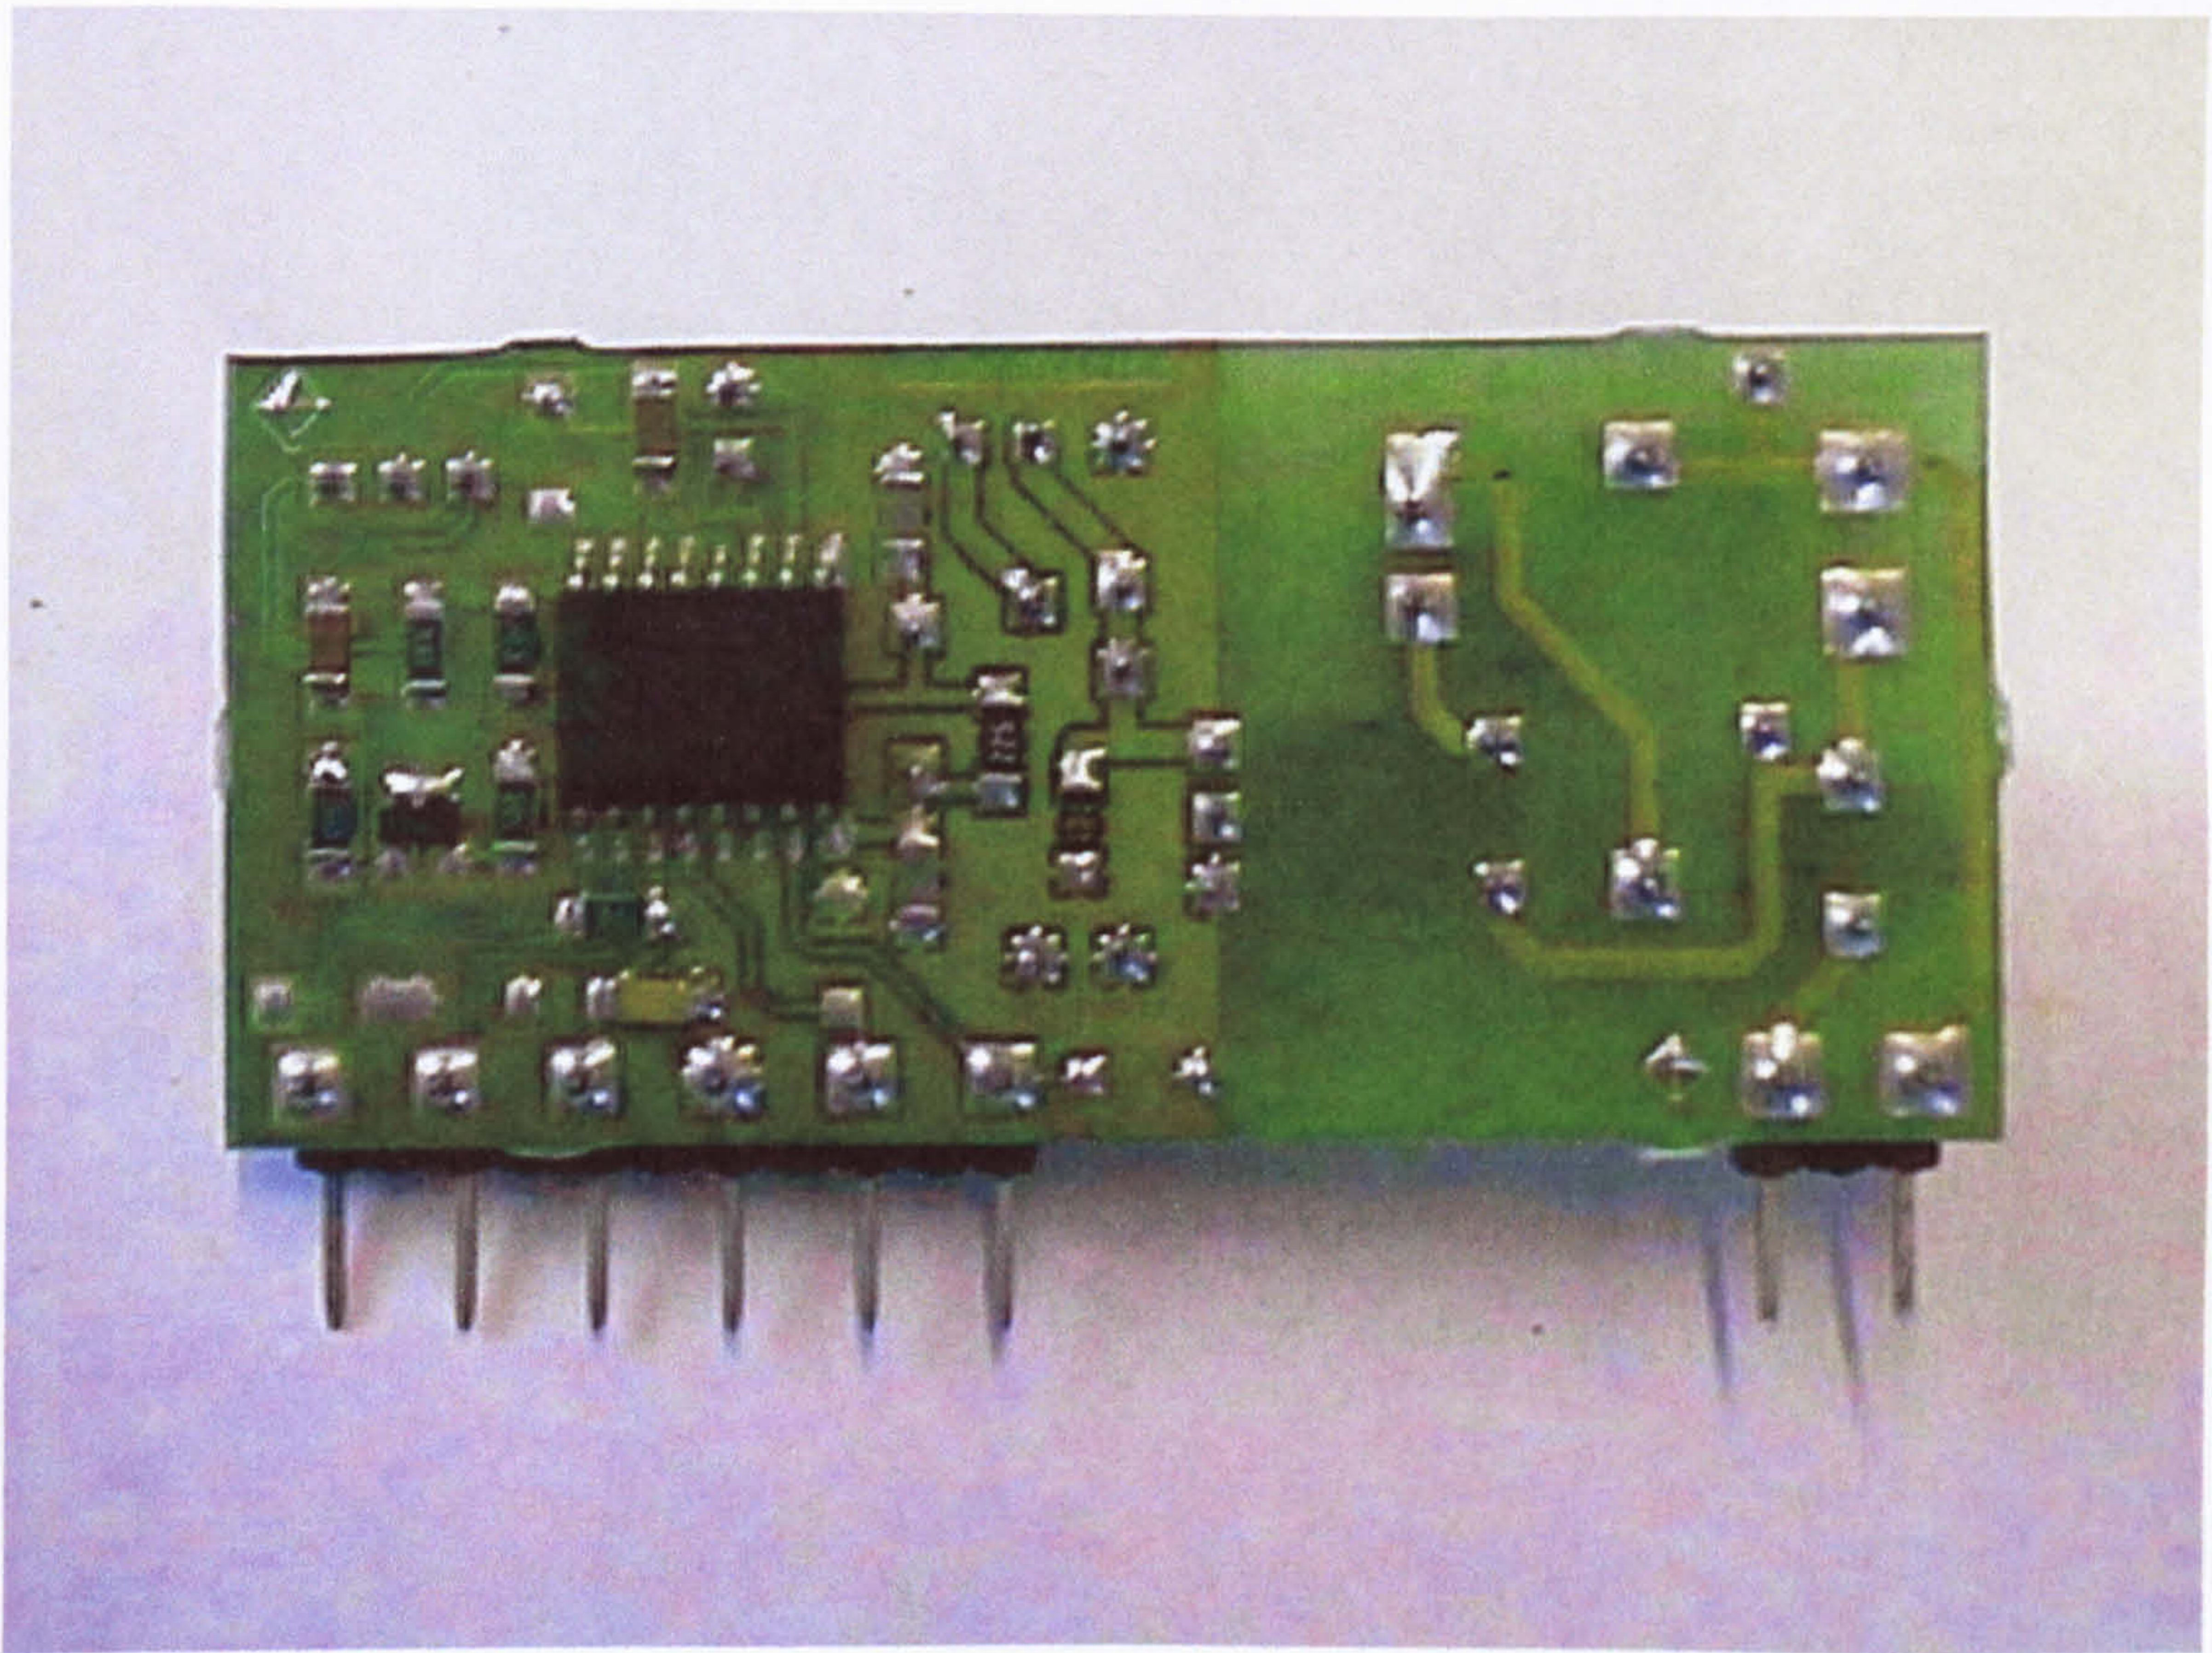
The TDA5051 Power Line Modem PCB (rear view)
